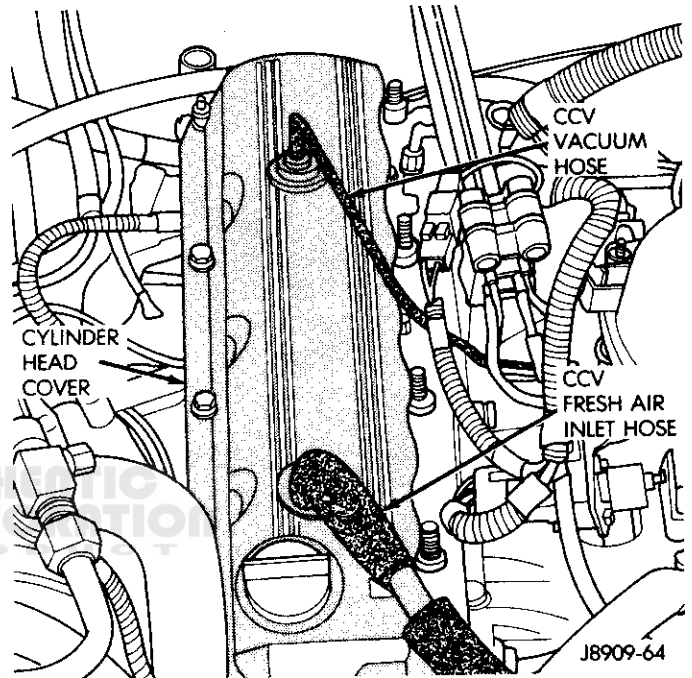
Cylinder Head Cover — MJ and XJ Vehicles
